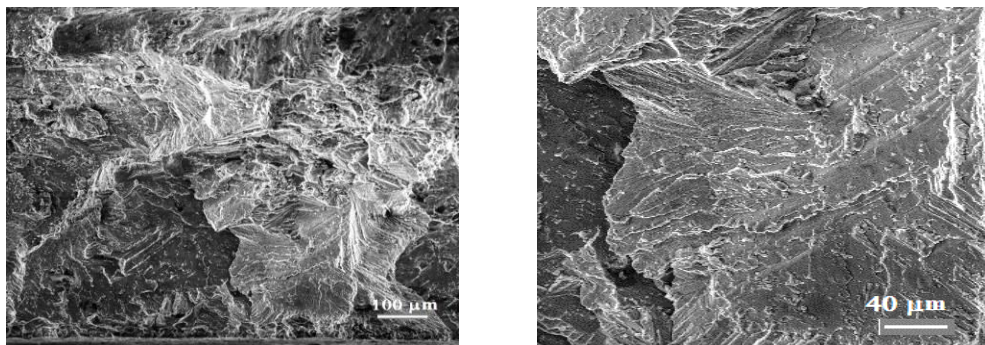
,b The entire width of the blade fracture and brittle nature of the fracture
